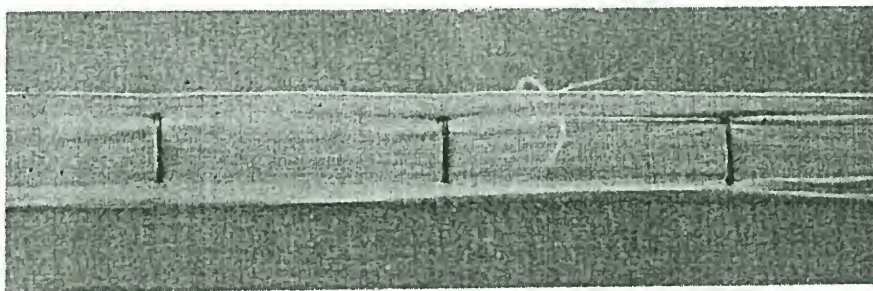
FABRIC STRUNG (OPEN PITCH) TO RIB
